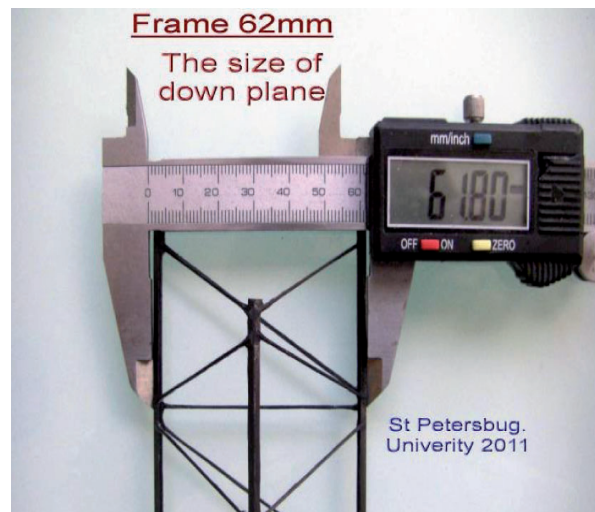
Measuring the critical dimensions of the first optimized STS space frame
